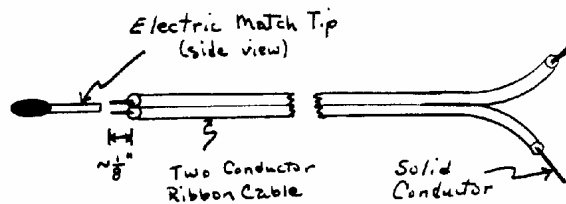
Sketch of two-conductor ribbon cable prepared for soldering to electric match tip.
